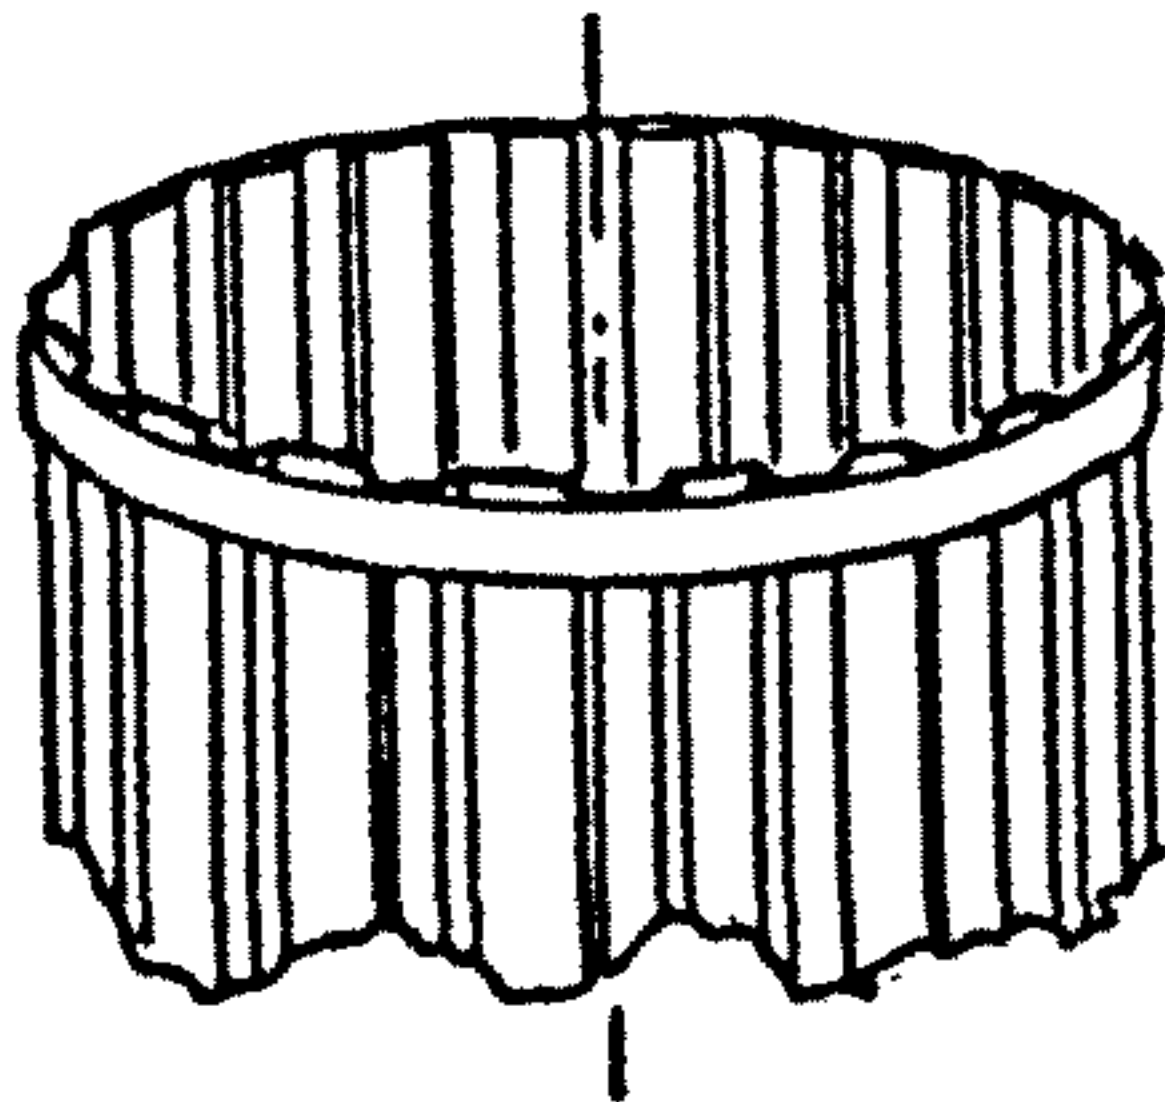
THRUST TUBE CONSTRUCTION TYPES
